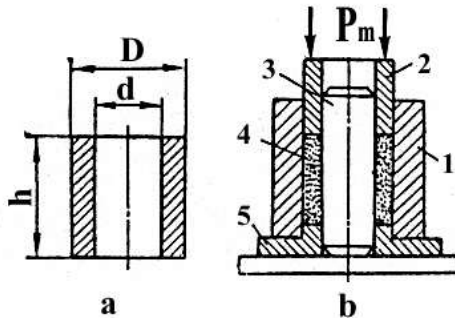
Draught of the bushing (a) and its manufacture scheme (b): 1 – bed mould; 2 – top mould; 3 – core; 4 – article (bushing); 5 – base
